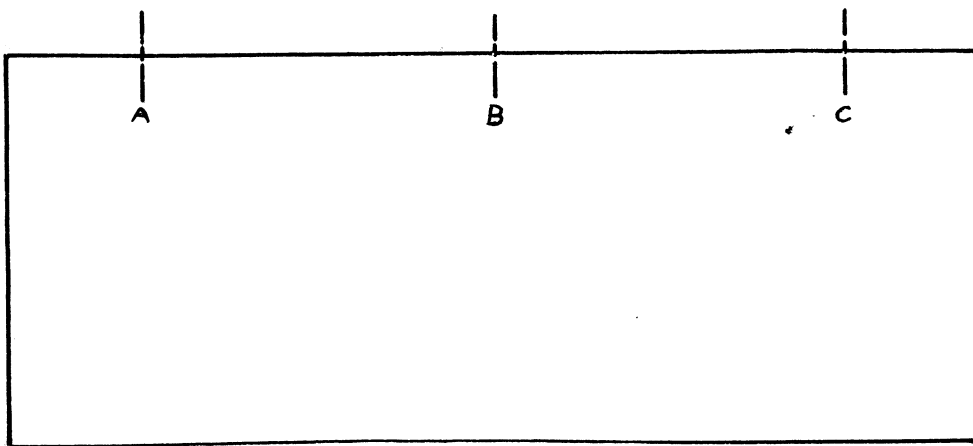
Sketch of Laboratory Stock Drawer Side.
